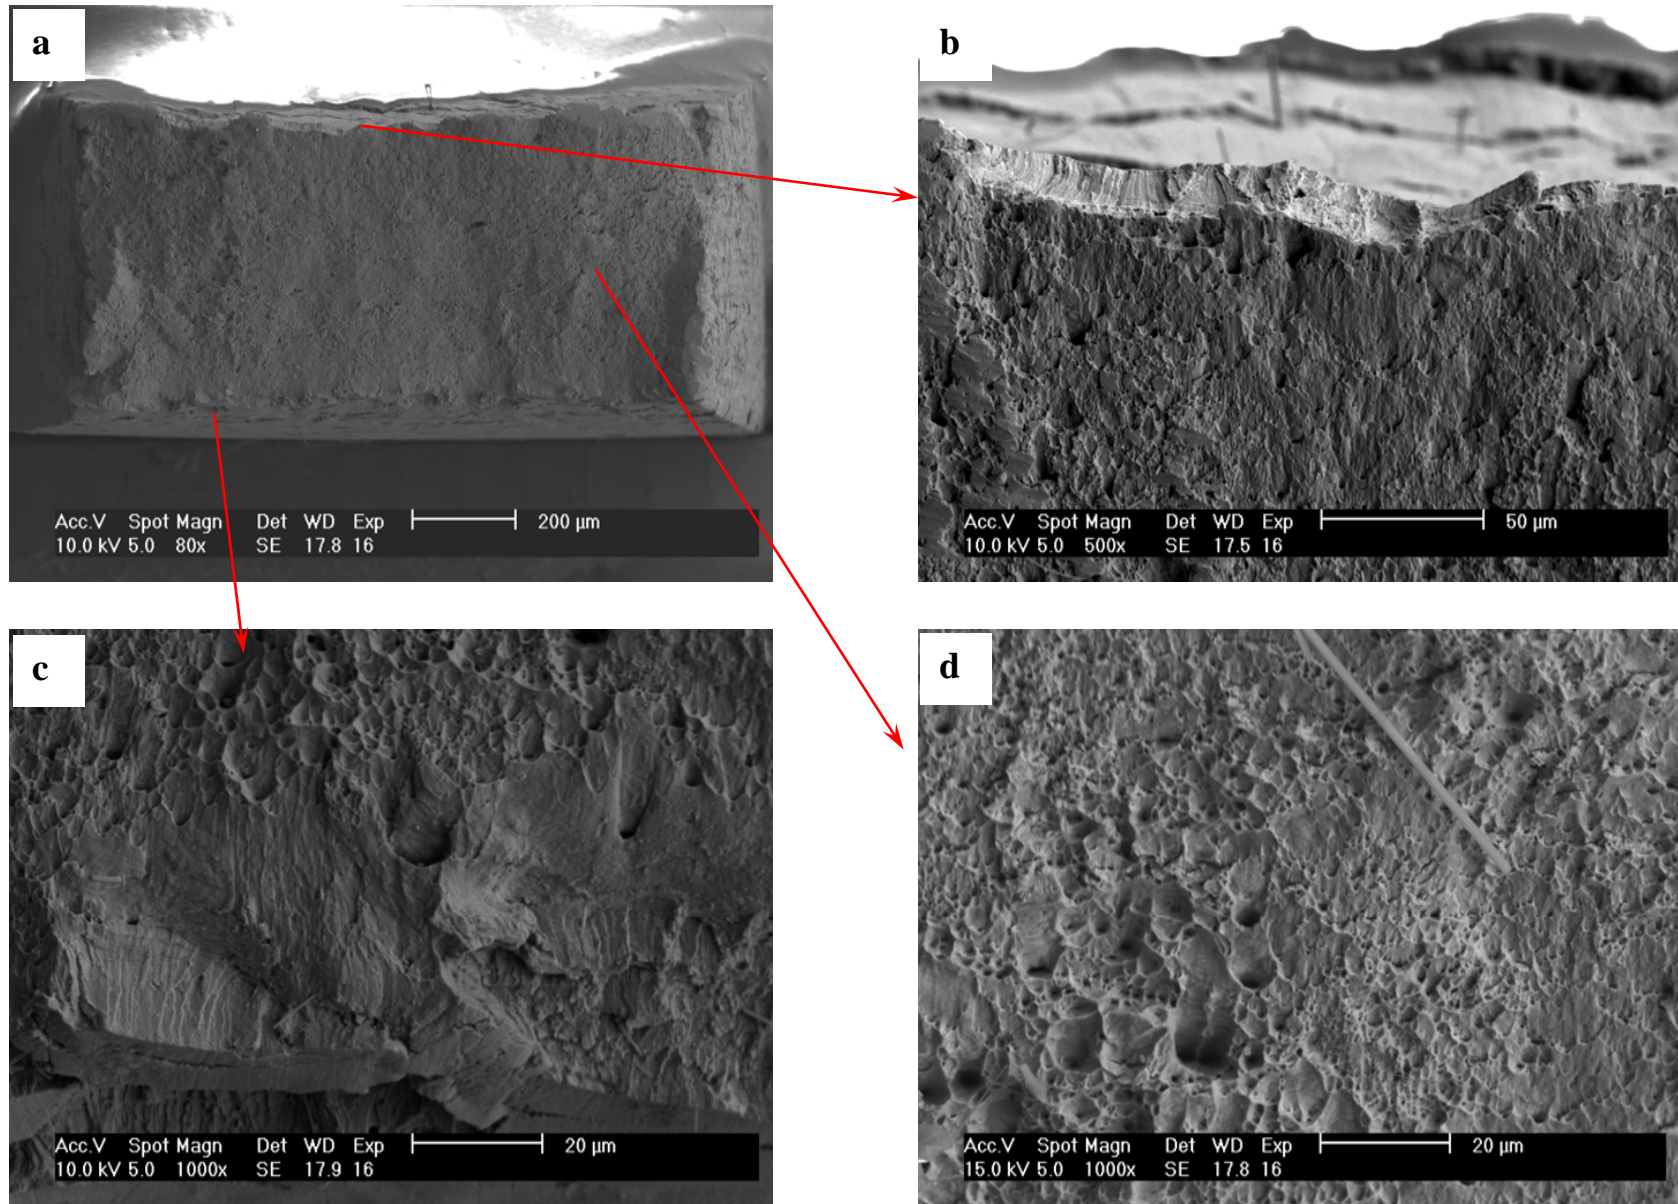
Fracture surface of SA 316 SS irradiated to 4.8 dpa and tested in PWR water (specimen B9-1).
